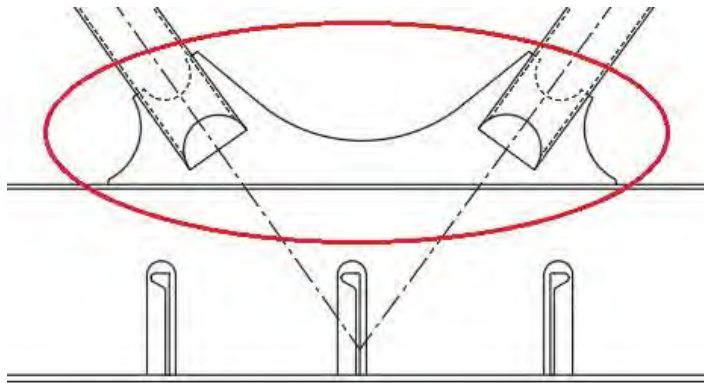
Joints between diaphragm trusses and flanges can be another case for robotic welding
